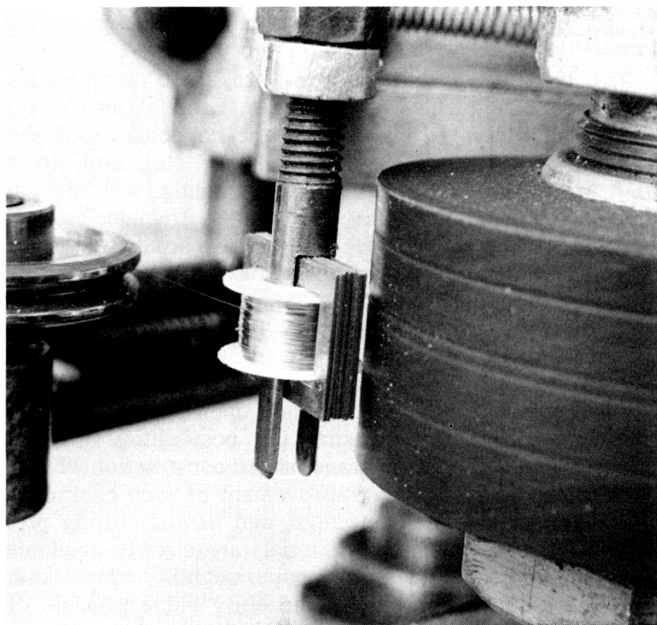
The winding process is shown. The laminations are held stationary while the coil form is friction driven by the rubber wheel at the bottom. The wire comes from the back of the winding machine.
